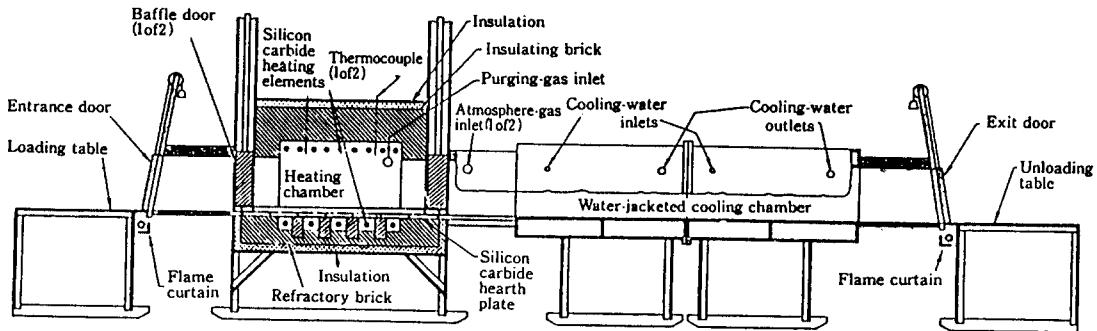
Pusher brazing furnace with a water jacketed cooling chamber
